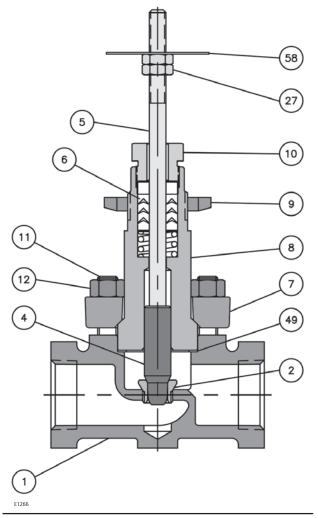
Baumann Flangeless (NPT) Threaded Valve Body Assembly with Single Extension Bonnet
